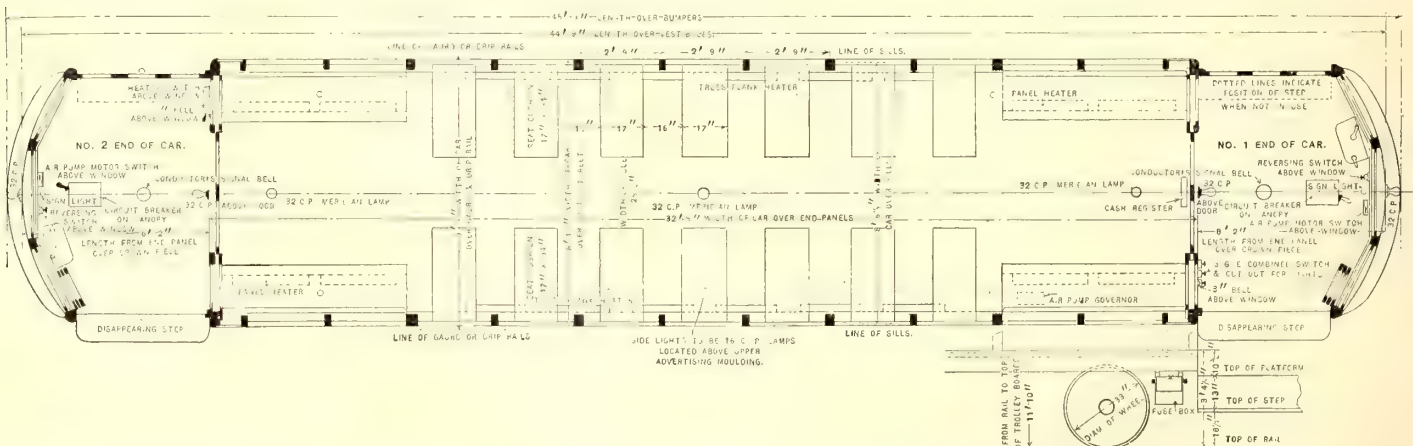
PLAN OF CAR, SHOWING DIMENSIONS AND LOCATIONS OF SEATS, HEATERS, SWITCHES, ETC.
